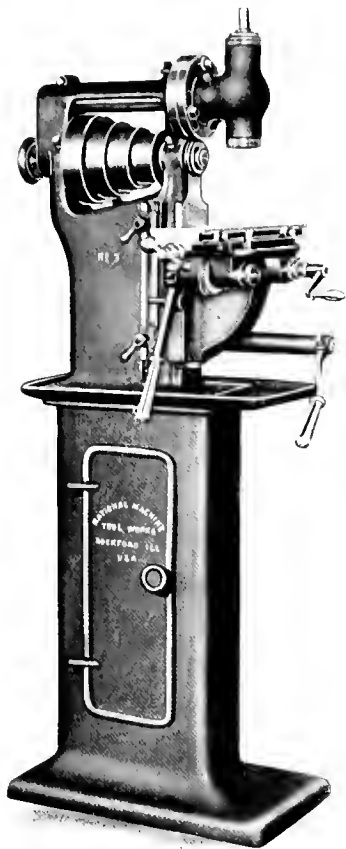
Hand Miller with Combination Screw and Lever Feed; Vertical Attachment shown in Place.
